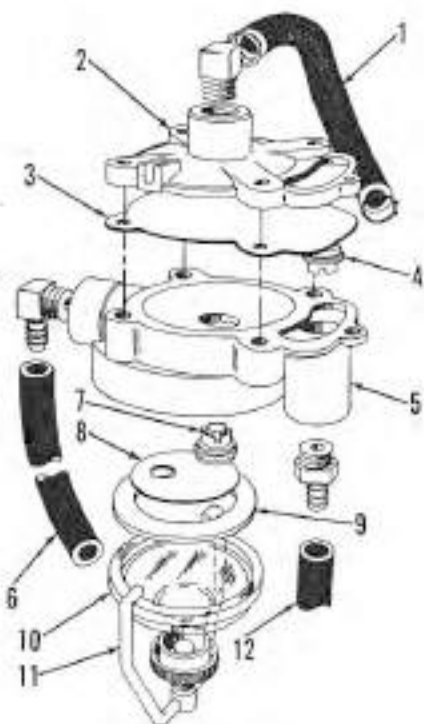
Exploded view of diaphragm type fuel pump. Refer also to Fig. Mc81.
